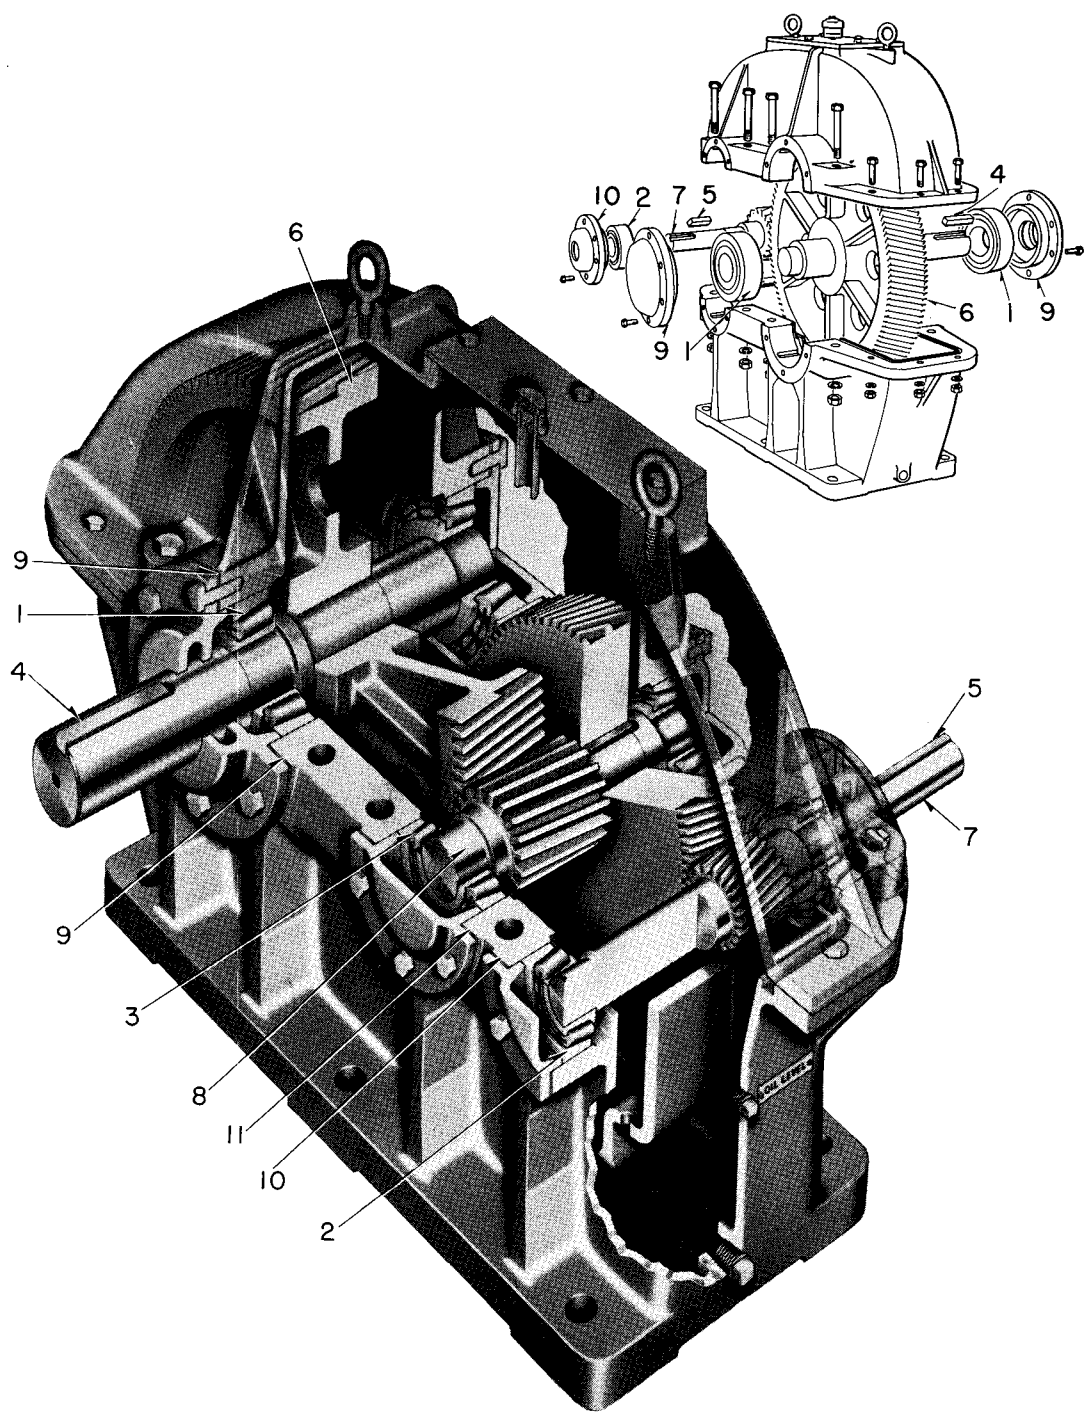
Shim Pack Arranged for Bearing Adjustment
